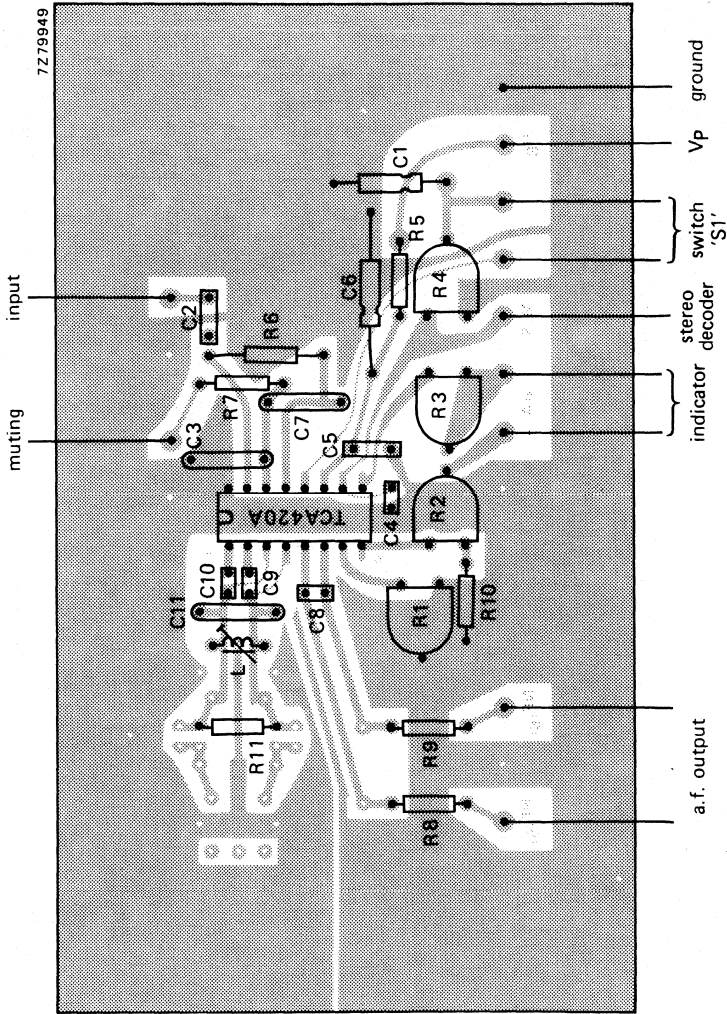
Printed-circuit board component side, showing component layout. For circuit diagram see Fig. 3.
